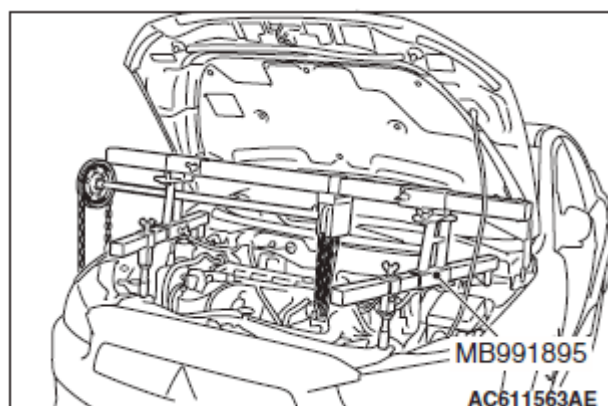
Supporting Engine Assembly Using Special Tool MB991895
